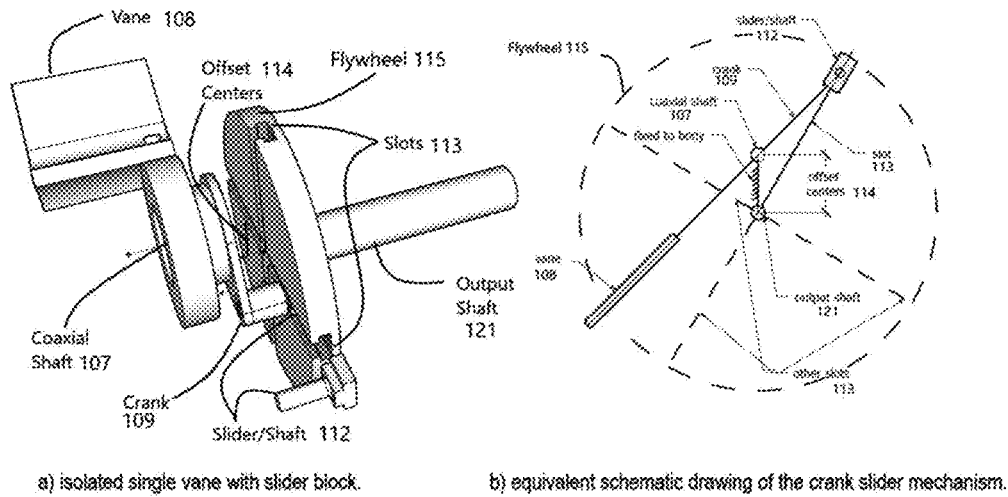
coaxial radial vane type motor, single vane with inverted crank/slider mechanism.
